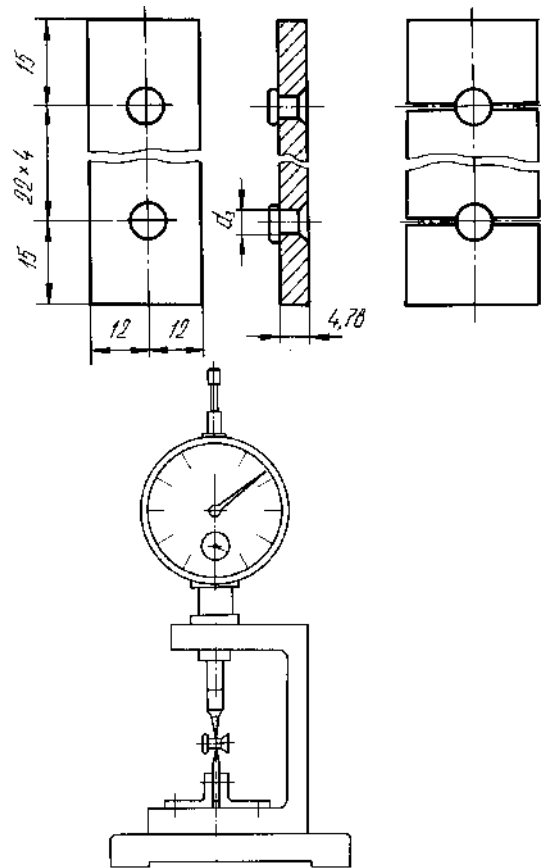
Device used for measuring diameters of unriveted rivets
